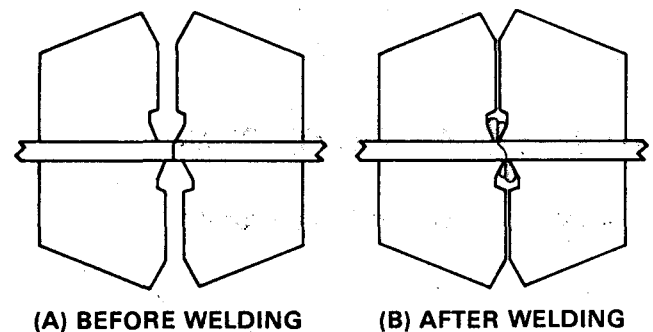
Cold Welding of Wire With an Offset Flash Technique
